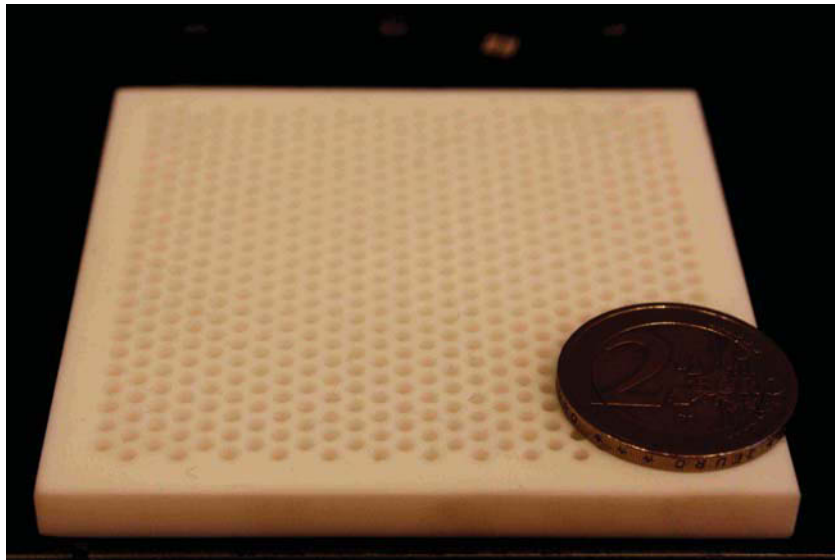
A plate of machinable ceramic material Macor with hexagonal array of holes. After covering of the plate with a thin metal foil and superimposing the holes in metal with the holes in the plate transmission and reflection will be measured.
